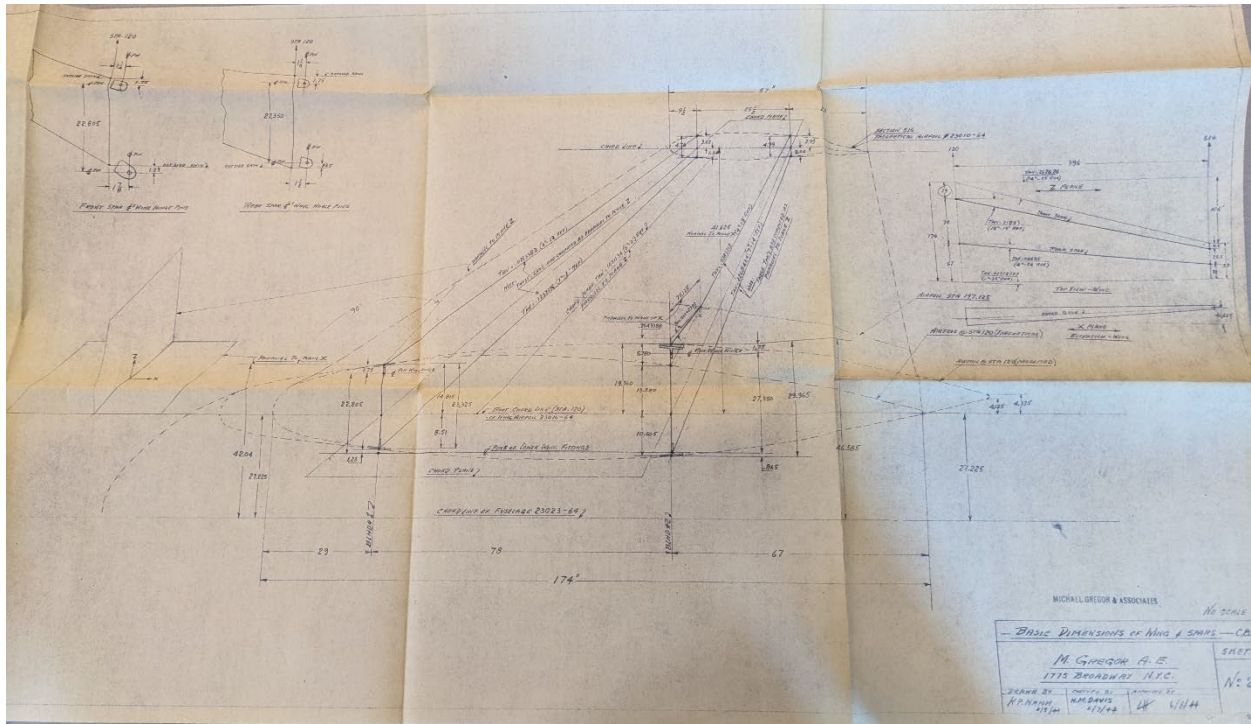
Basic Dimensions of Wing & Spars [NA2]
